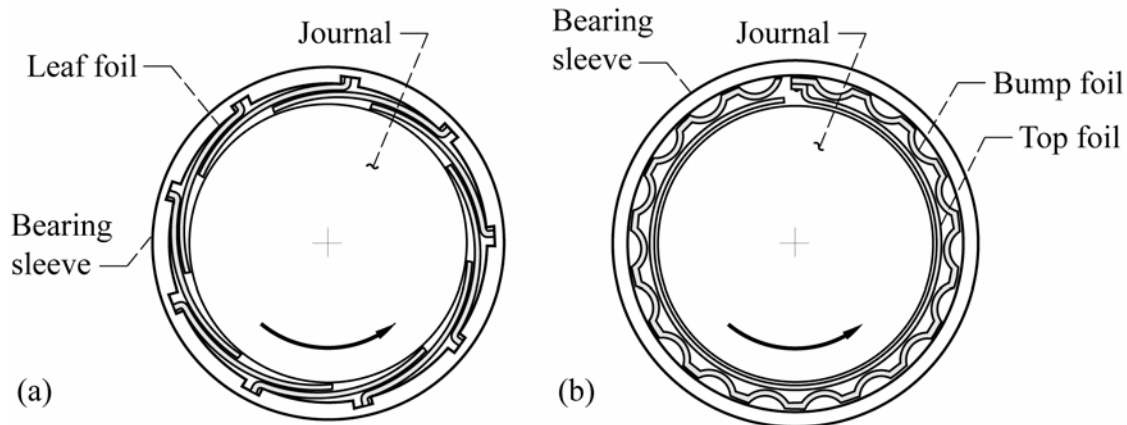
Schematic example of first generation foil bearings with axially and circumferentially uniform elastic support elements. (a) Leaf-type foil bearing. (b) Bump-type foil bearing.
